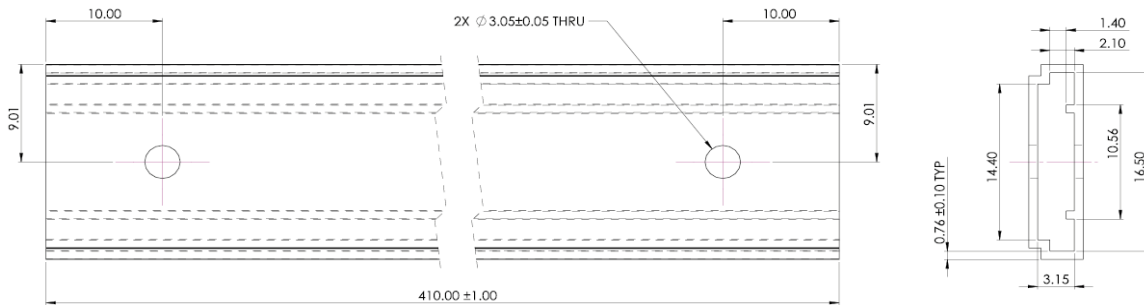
Tube dimensions for L2C5-xxxx1204F0900 and L2C5-xxxx1205F1100.
